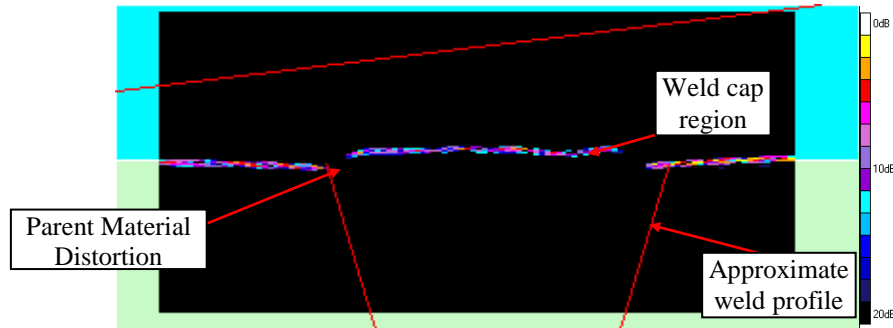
Weld cap profile of the flat plate welded test-pieces ultrasonically measured using the membrane device.
